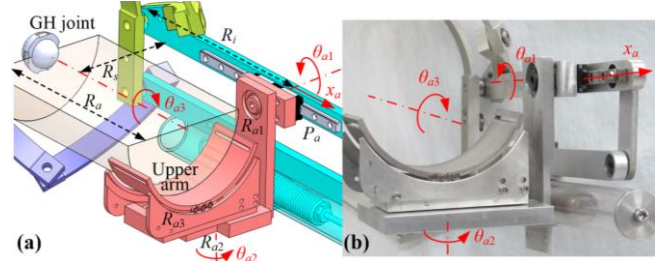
(a) CAD model of the adaptive mechanism (b) Prototype
